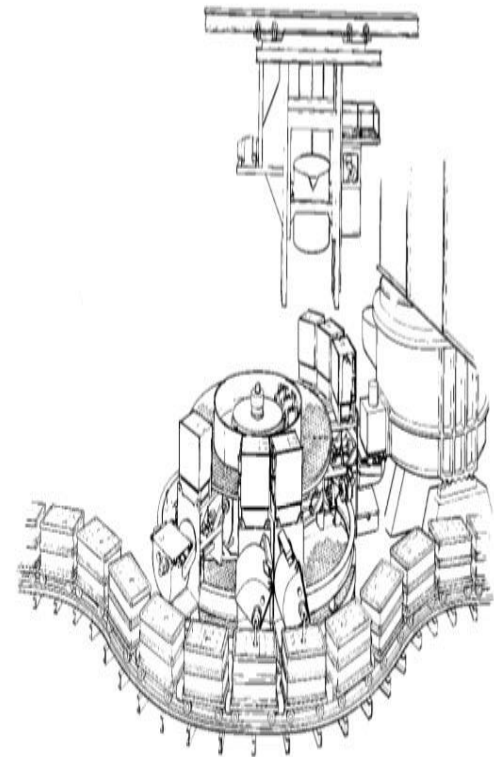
Automatic pouring of molds on a conveyor line. (Courtesy of Roberts Sinto Corporation, Lansing, MI.)
